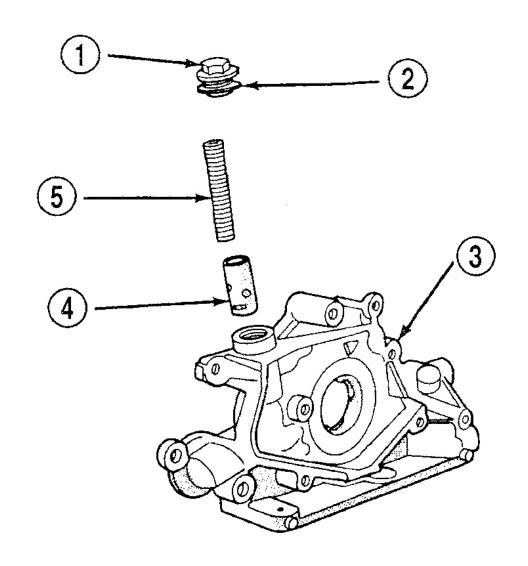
Identifying Oil Pump And Tube Courtesy of DAIMLERCHRYSLER CORP.
